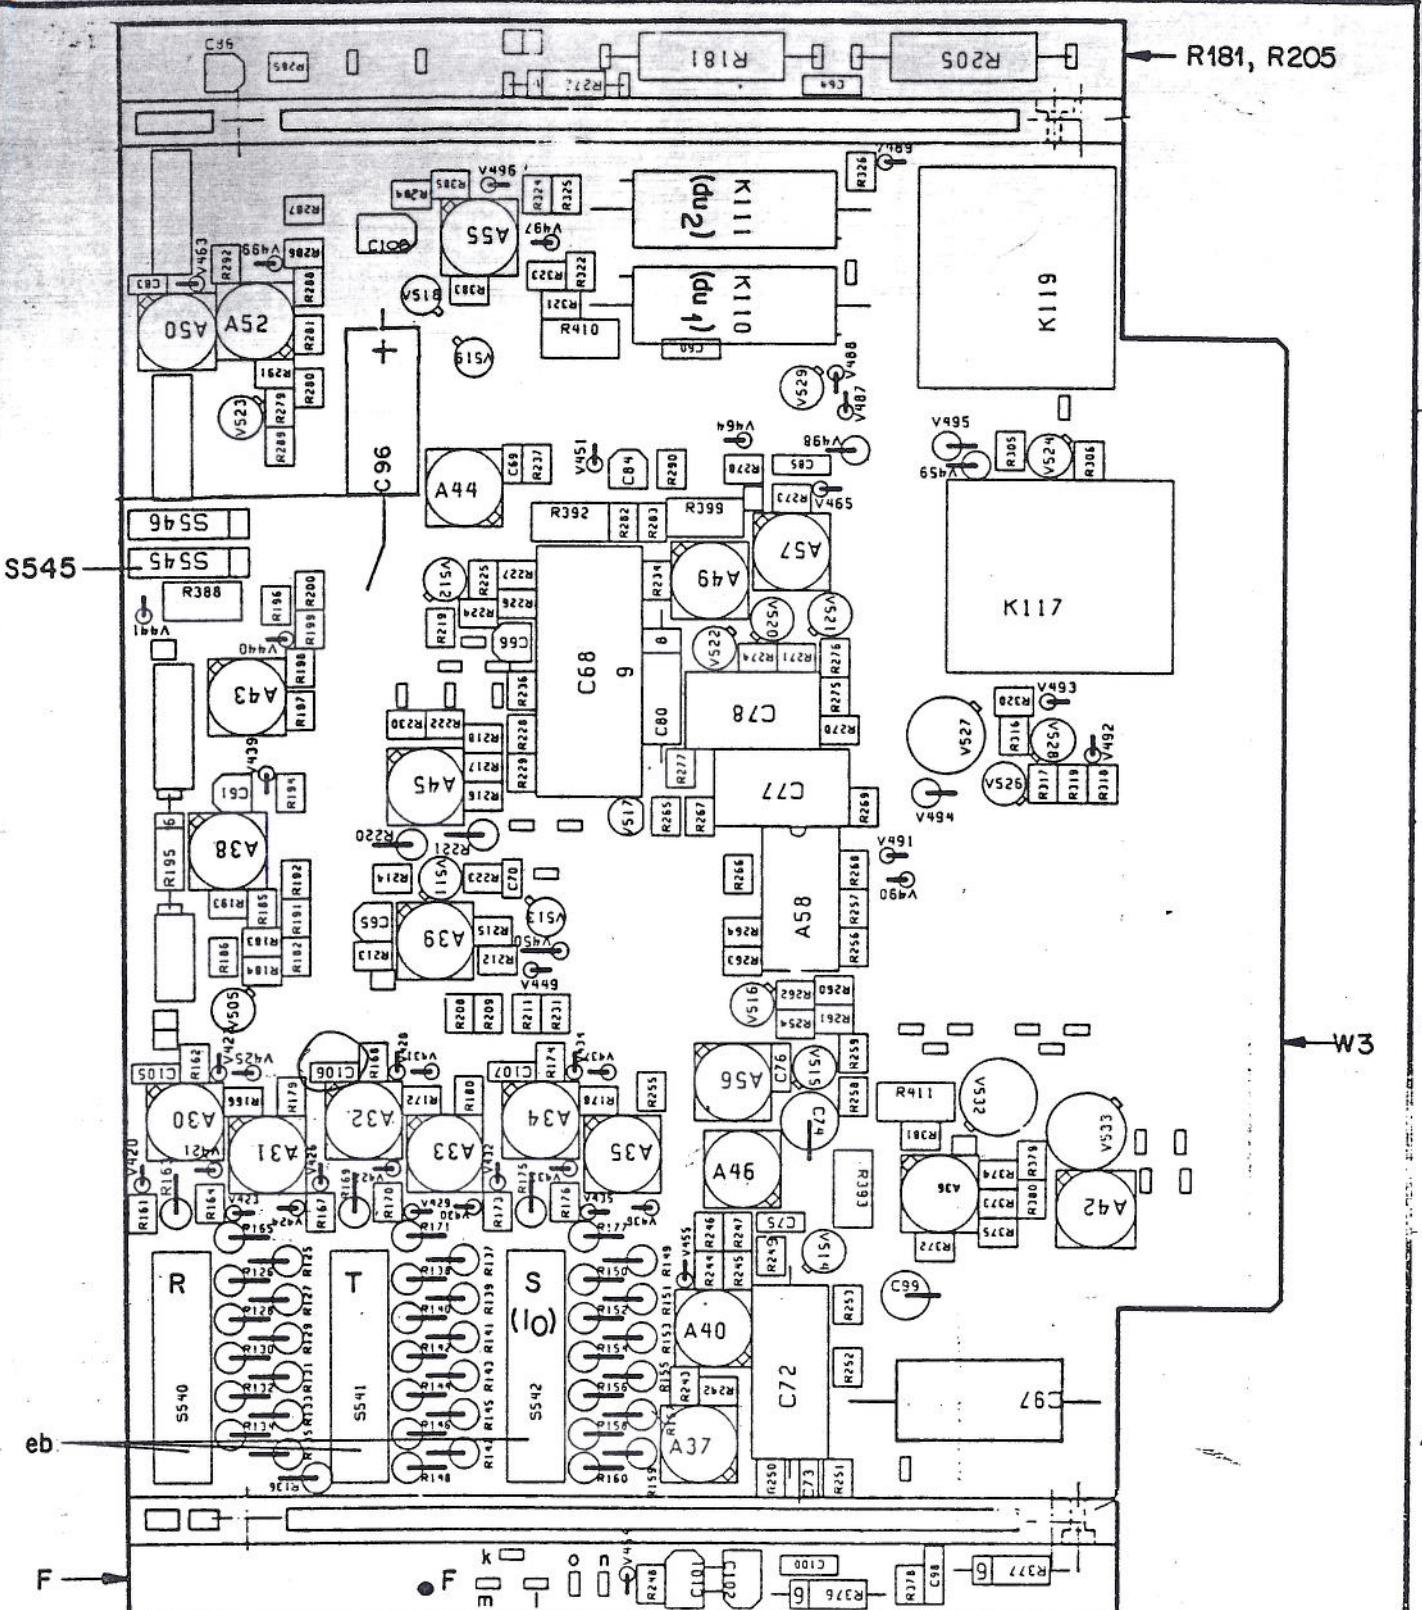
Rear view of the motor protection relay ITX192 (193)
